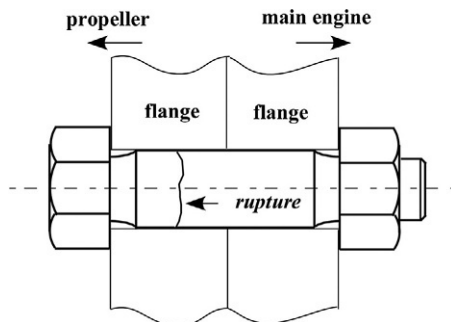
Rupture of reamer bolt used for shaft coupling of ship propeller.
